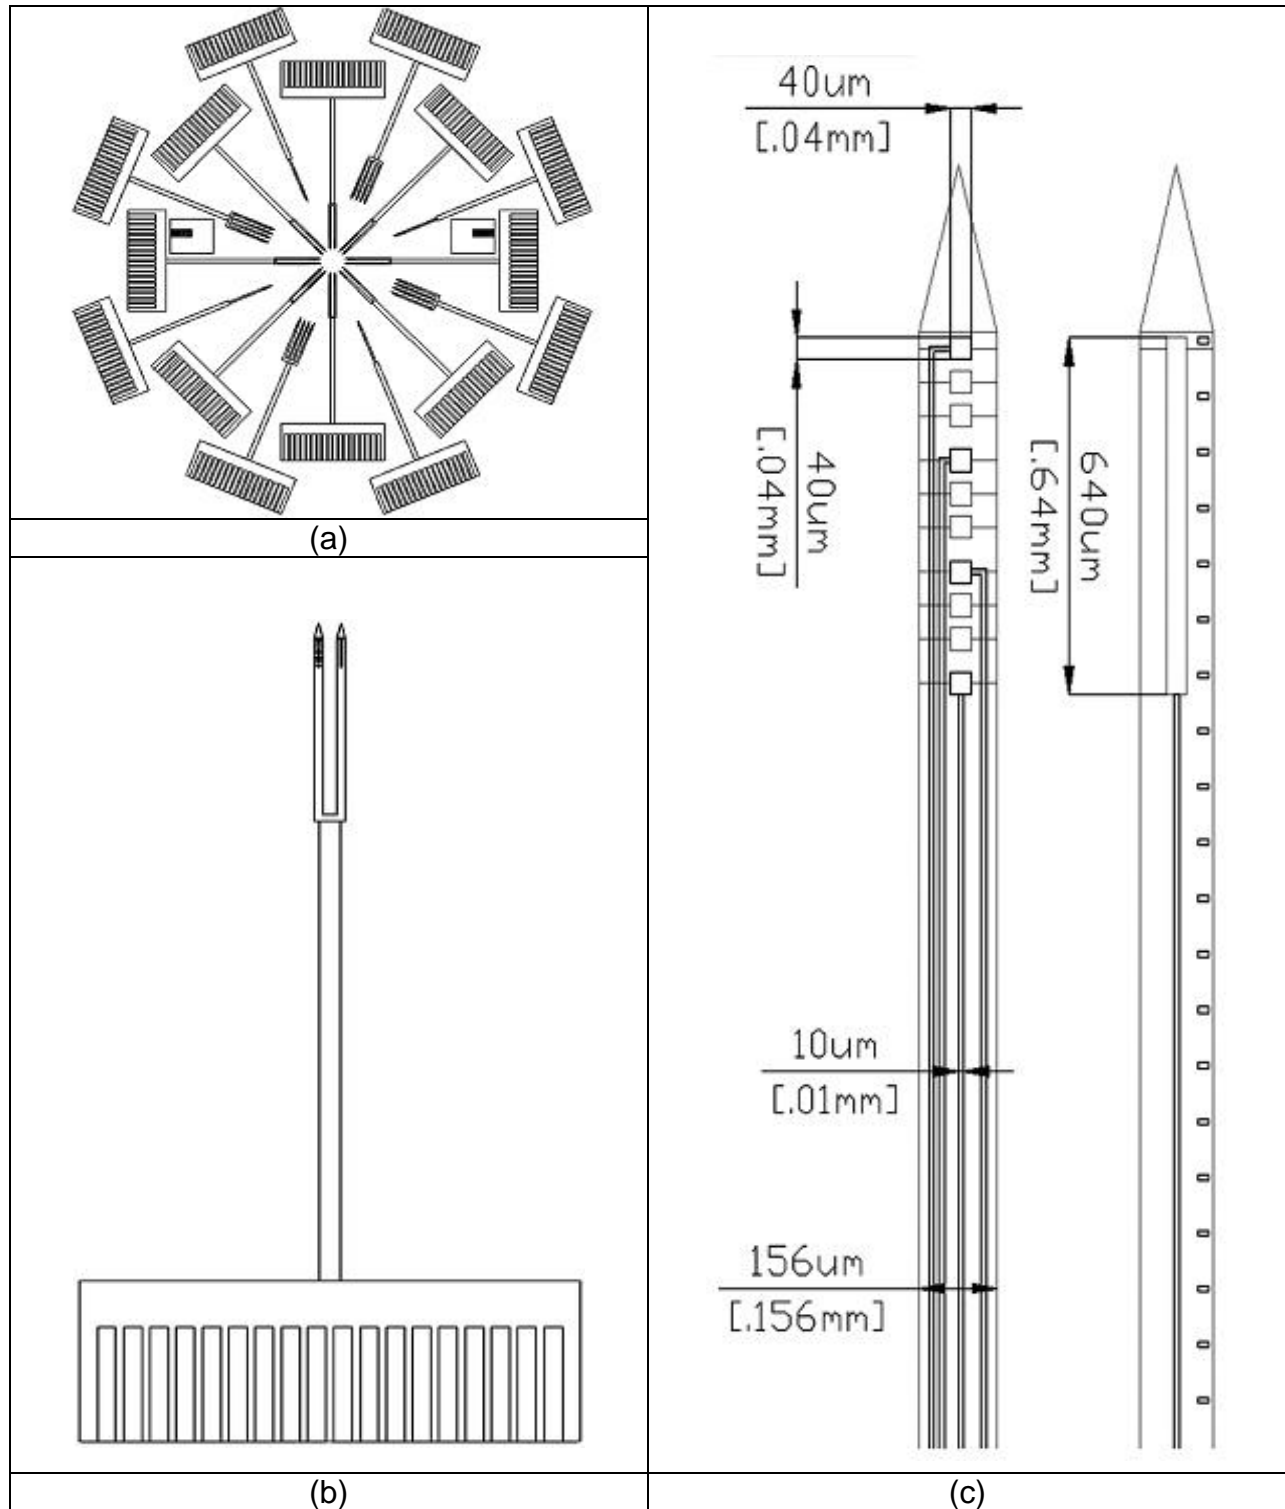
a) AutoCAD layout of 16 devices that can be produced during a single batch processing. b) Enlarged two shaft devices. c) Dimensions of a two-shaft device showing 40 μm x 40 μm contact sites, 10 μm wide trace lines and two shafts measuring 156 μm .
